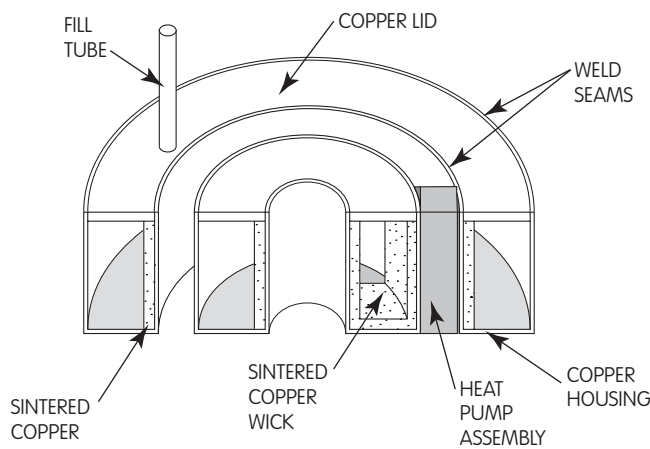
Cross sectional view of heat pipe rings (not to scale).
